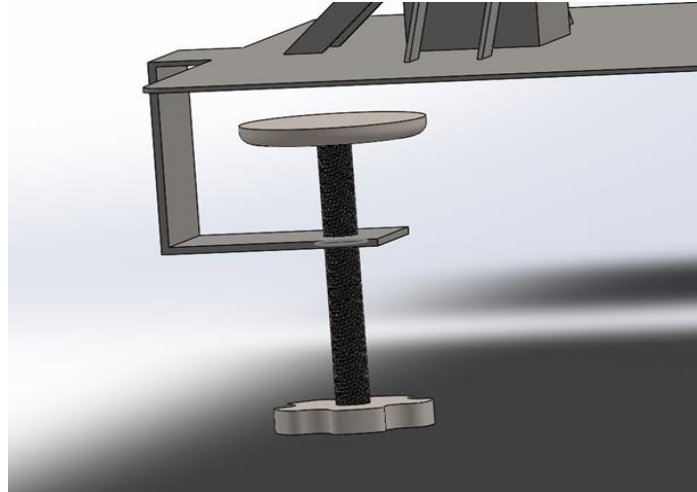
A close-up of the C-clamp and C-clamp screw.
